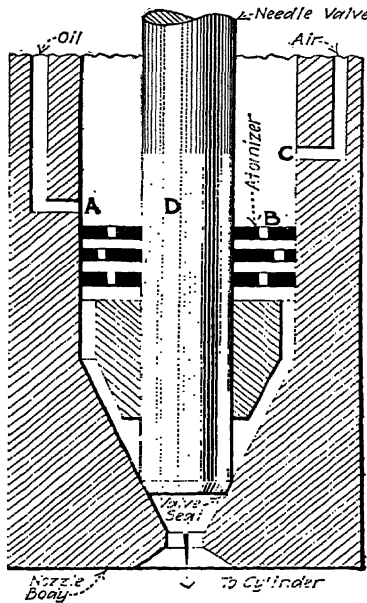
Simple fuel-injection valve for high-pressure oil engine.
